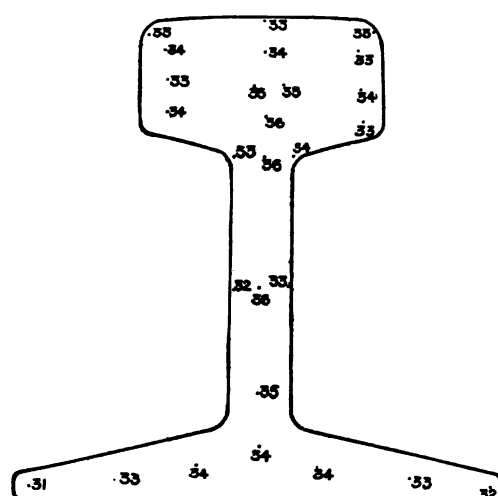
Scleroscope Tests on Bessemer Rail. (Am. Ry. Eng. Assn.)
